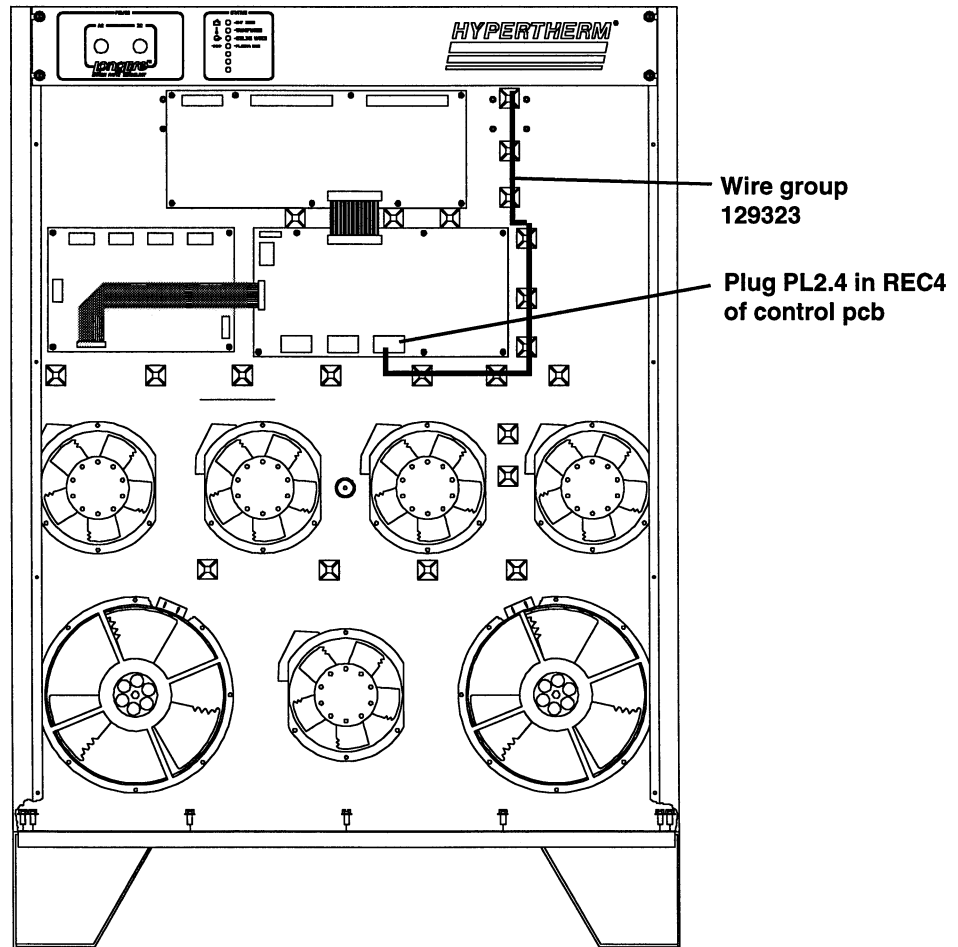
Routing 129323 Wire Group to Control Board - 2 of 2
